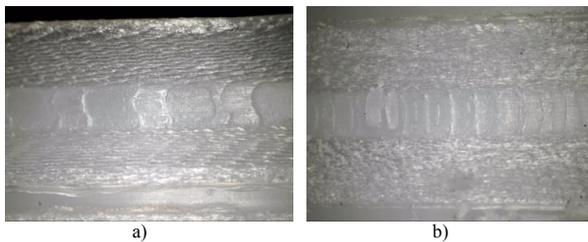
Machined surface for 20° rake angle, highly worn tool, low depth of cut, a) low cutting speed, b) high cutting speed. Cuts performed from right to left
